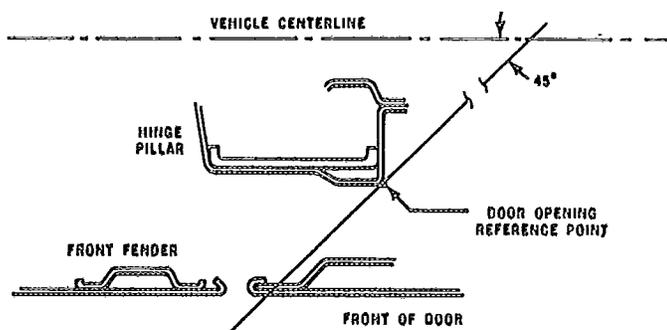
Typical Section A-A Showing DOR Point With Hinge Pillar Tangent to 45 Deg Line
